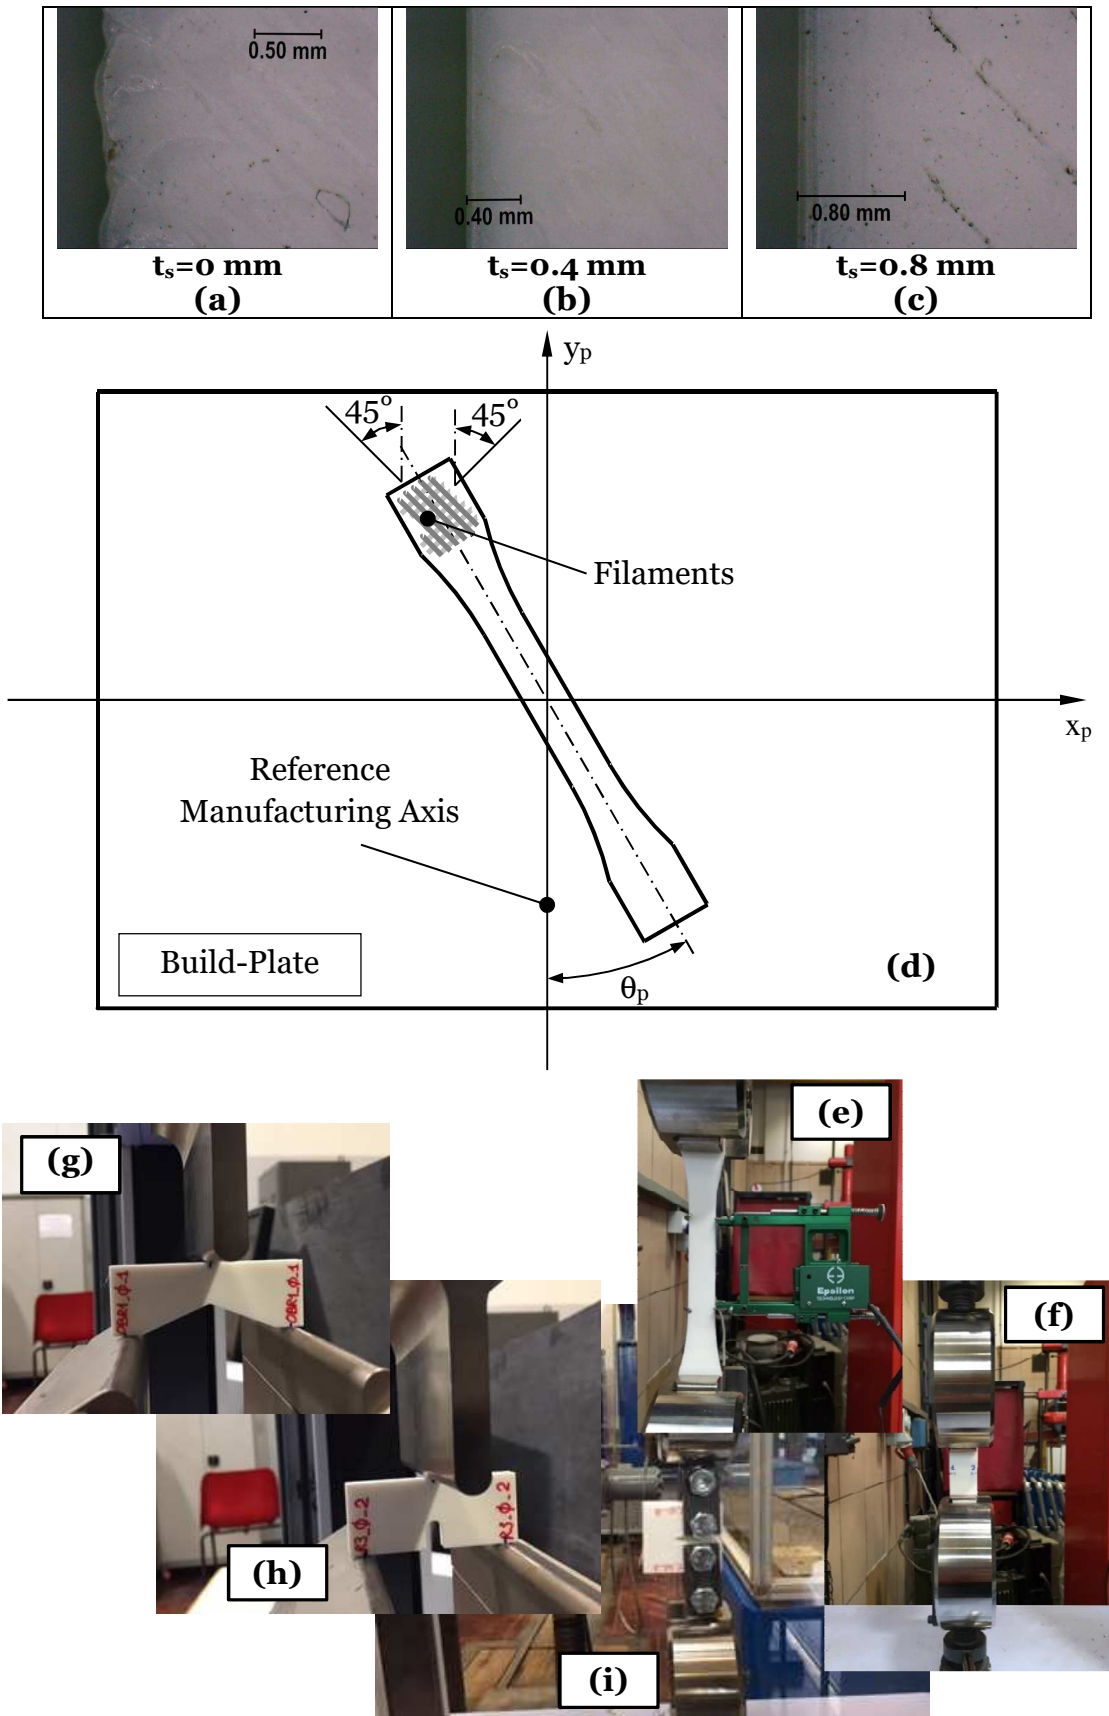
Specimens manufactured by setting the shell thickness, t_s , equal to 0 mm (a), to 0.4 mm (b), and 0.8 mm (c); definition of manufacturing angle θ_p and orientation of the deposition filaments (d); examples showing the different testing set-ups that were used to test plain specimens under tension (e), samples with opposite notches under tension (f), rectangular plate with single notch under three-point bending (g, h) and C(T) specimens (i).
